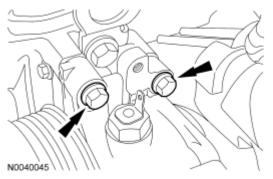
Locating Upper Power Steering Pump Bolts Courtesy of FORD MOTOR CO.
